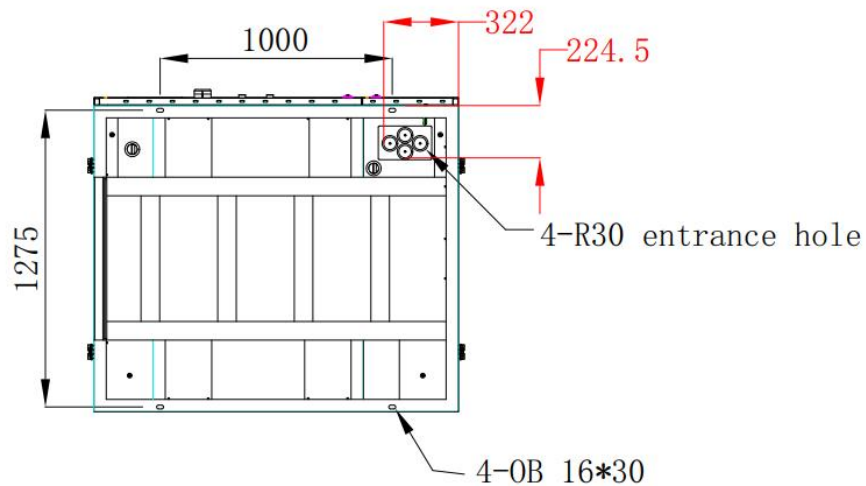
Bottom structure of battery cabinet (bottom view)
